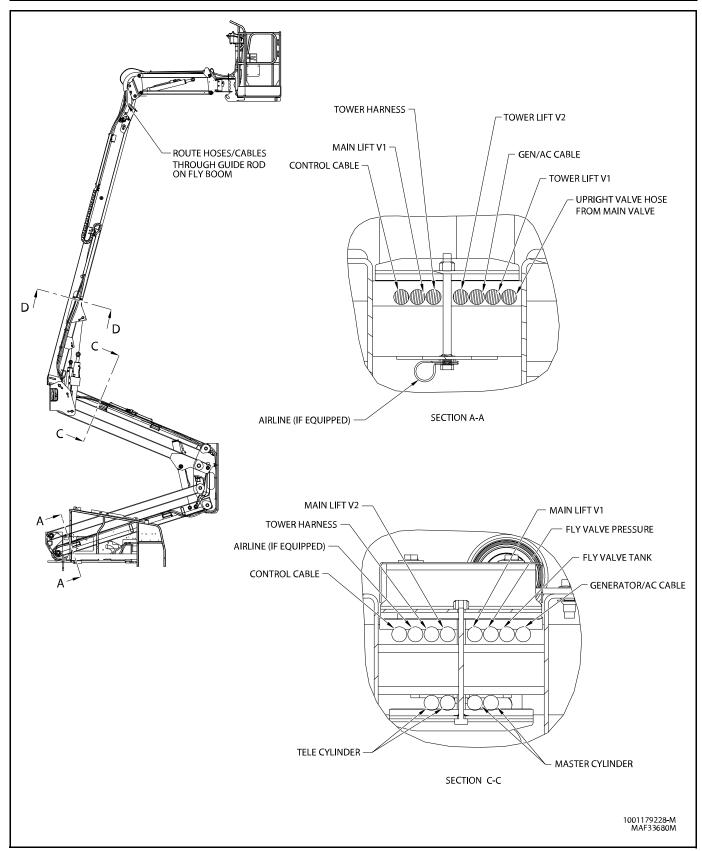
Cables and Clamps Installation - Sheet 1 of 8
